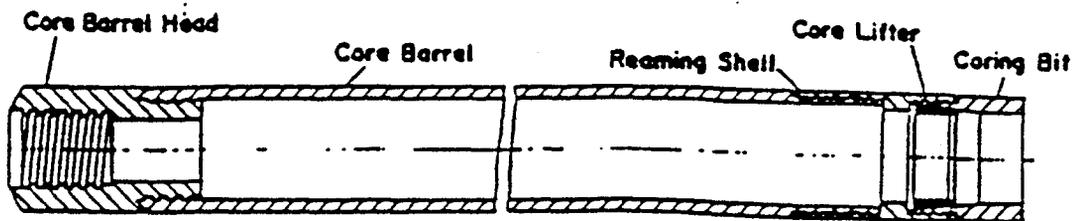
Single tube core barrel. (Courtesy of Sprague & Herwood, Inc.)
